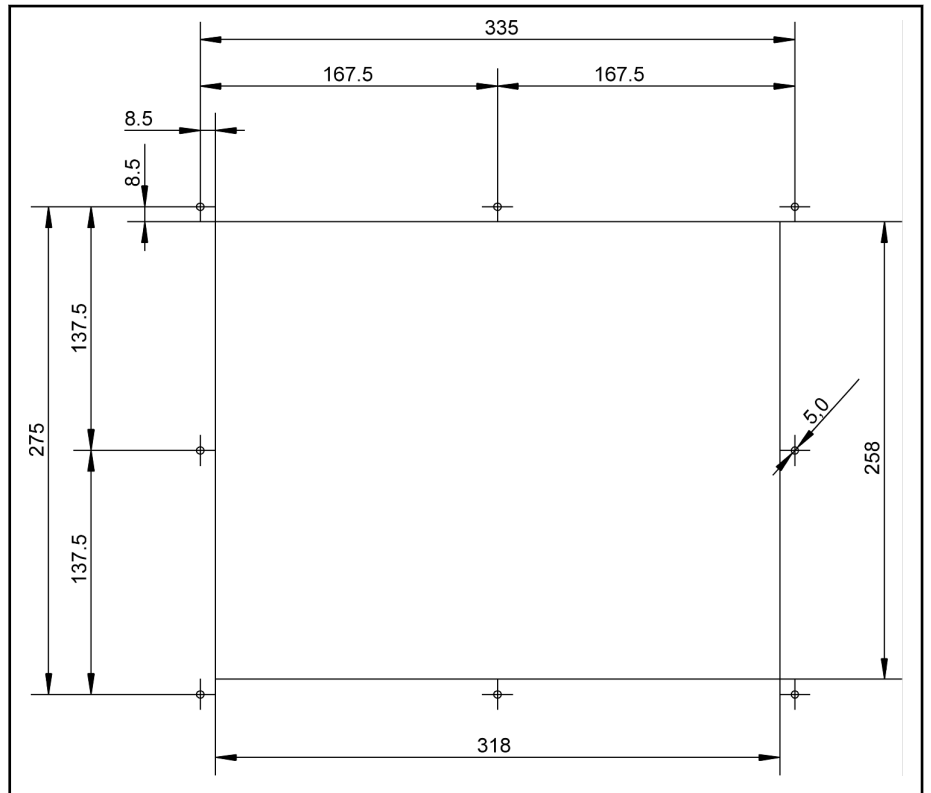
Mounting dimensions of the VDP 16.3 devices
